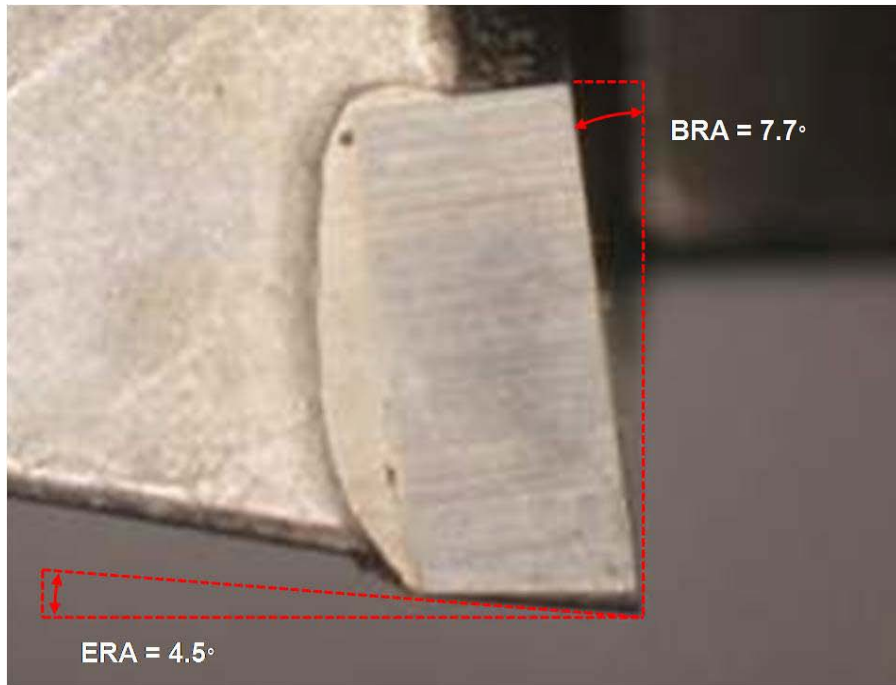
Flycutter showing Back Relief Angle (BRA) and End Relief Angle (ERA).
